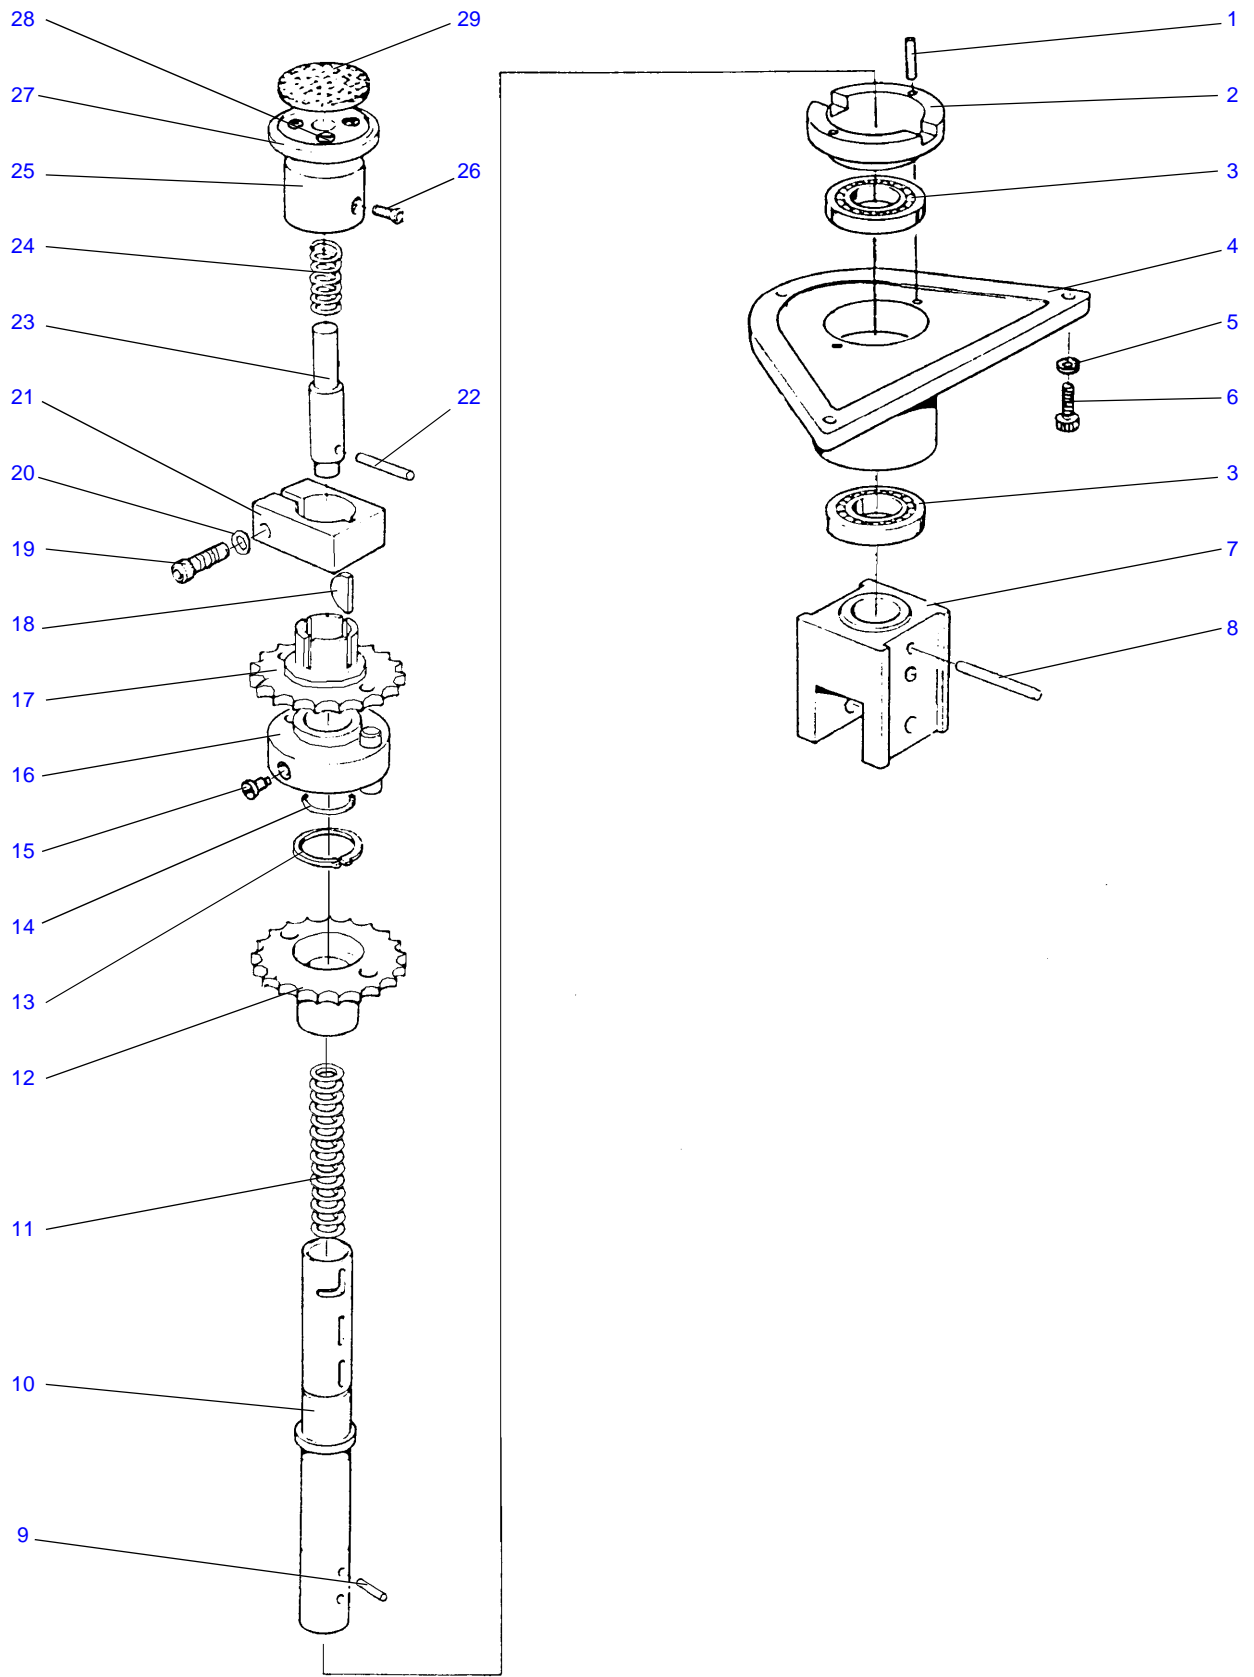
Tern Pedestal - Steer/Crab Assembly (3741-10)
